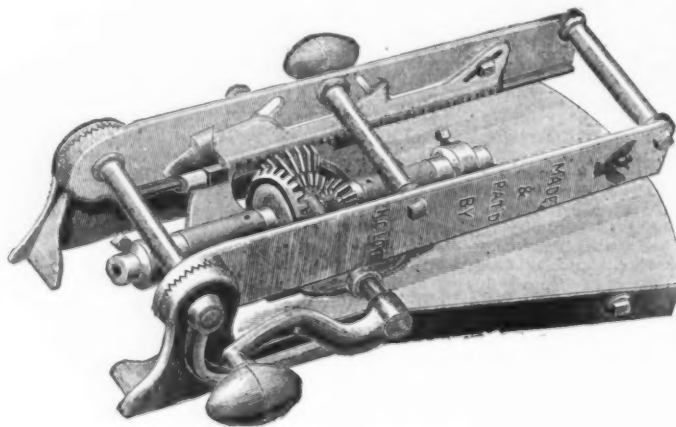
The Boss Two-Speed Boring Machine, Folded.
